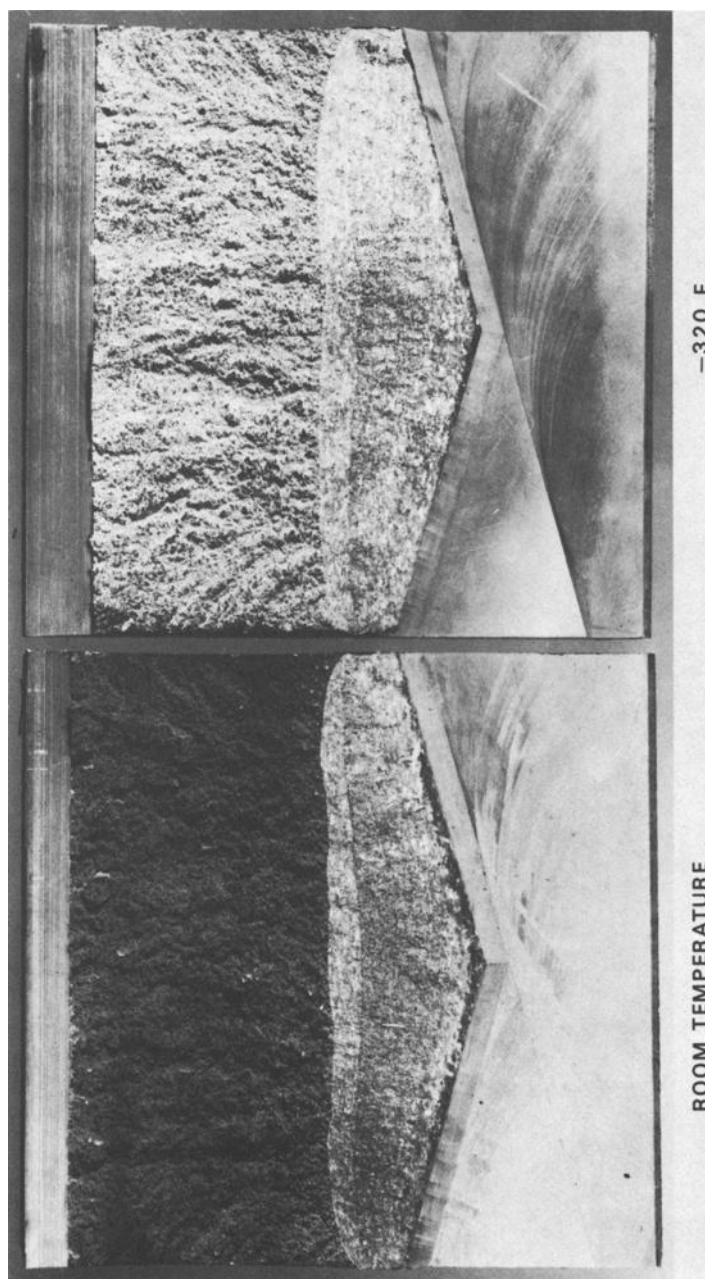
Fracture surfaces of 7.7-in. notch bend fracture toughness specimens (TS-orientation) from 7.7-in.-thick plain 5083-0 plate (S-410801) (about $\times 0.6$).
